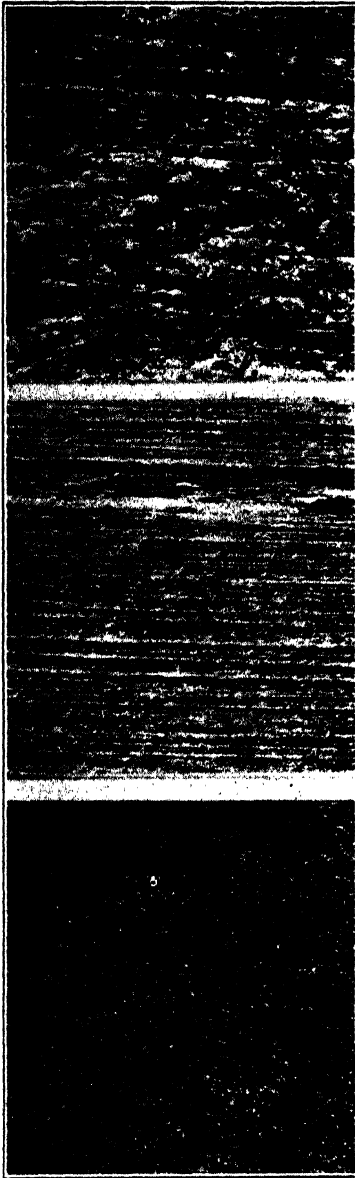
Sheet steel surfaces—natural size. Not Cold-rolled for surface. See Fig. 52, p. 166, "Sheet steel surfaces: Single Pickled and Cold-rolled; Double Pickled and Cold-rolled."
